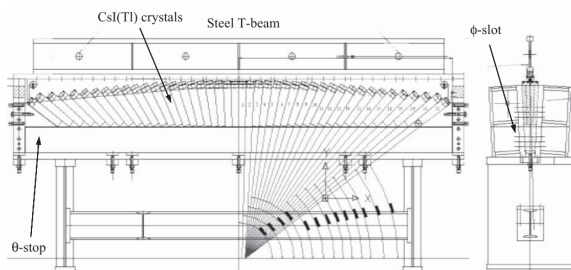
The side and cross-sectional views of the barrel super module assembly jig [32].
